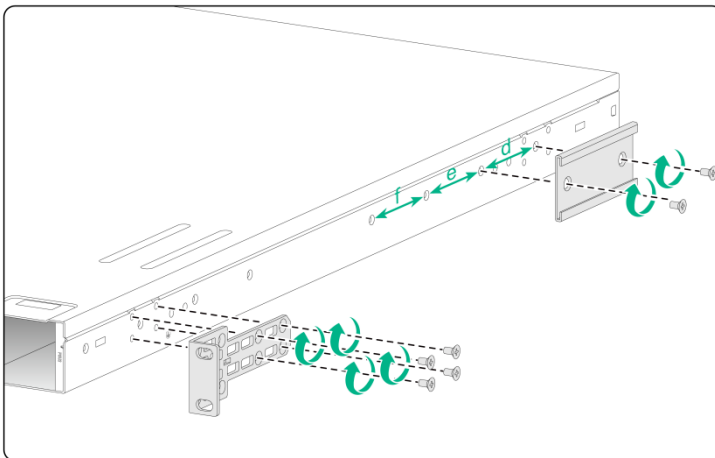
Attaching the mounting brackets and chassis rails to the S9855-40B switch (port-side mounting position for the mounting brackets)
